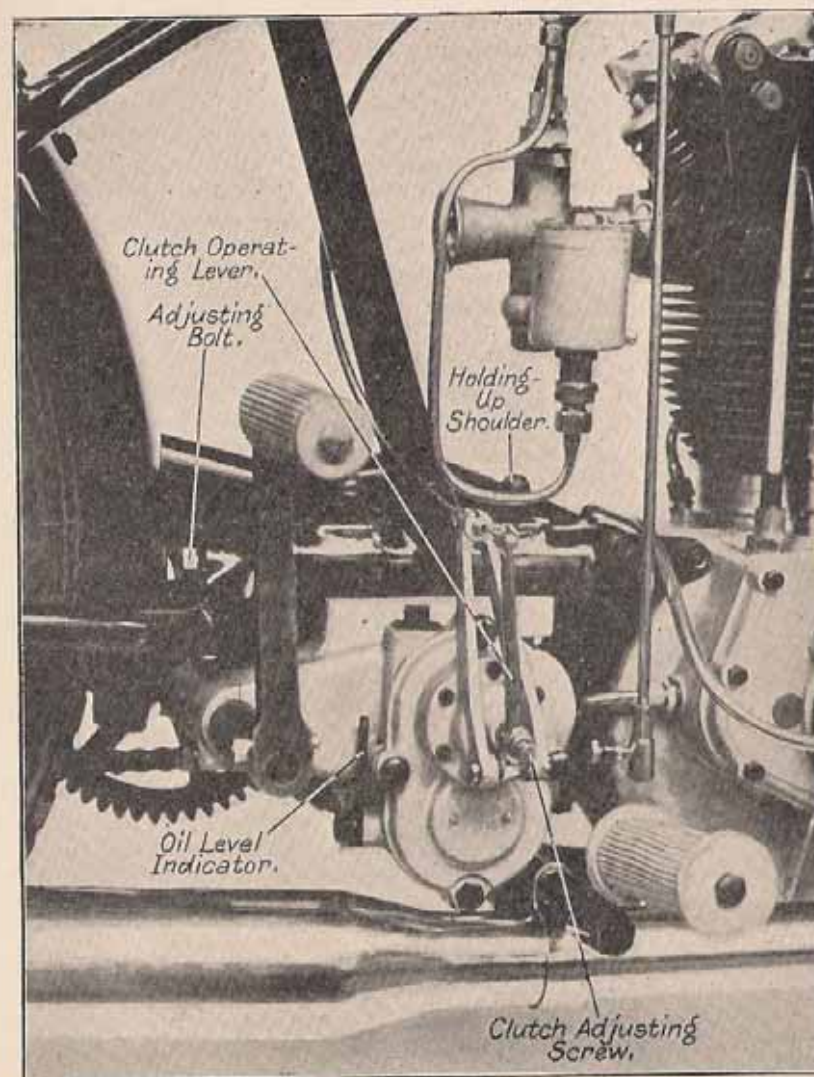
SHOWING GEAR-BOX AND CLUTCH OPERATION
